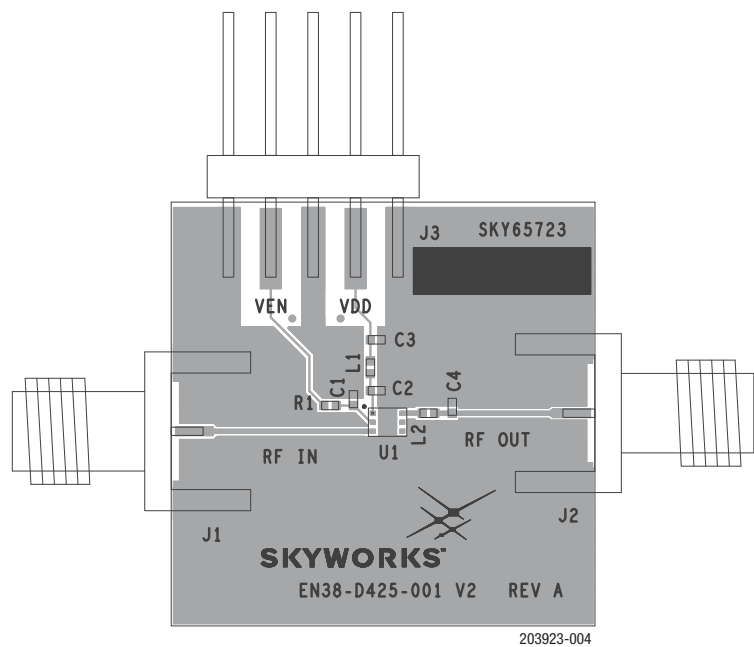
SKY65723-81 Evaluation Board Assembly Diagram
